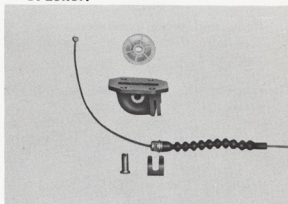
Pulley Bracket V1350 & Cable No.1
